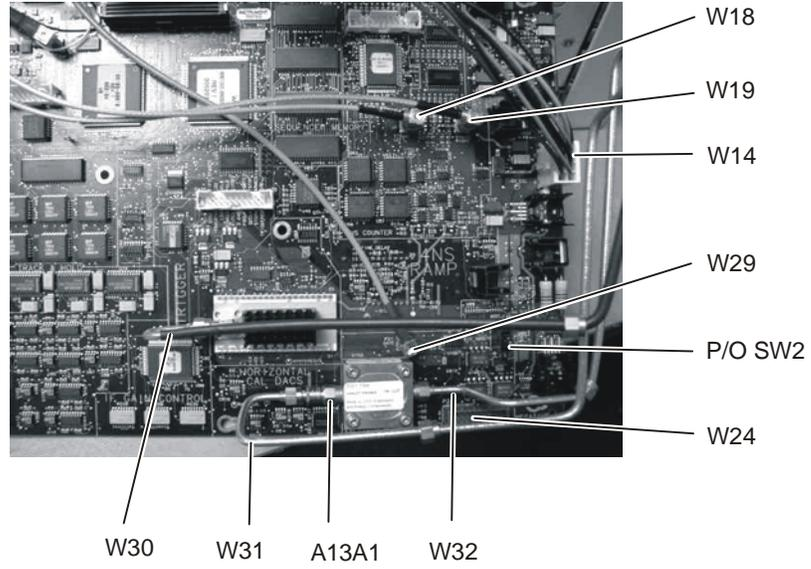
Cables from the A13 Acquisition Board (option 001)
